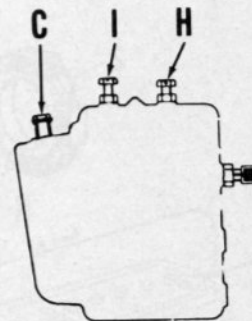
Drawing showing location of low idle speed screw (I), high idle speed screw (H) and torque control screw (C) on all models except 834 and L54.
